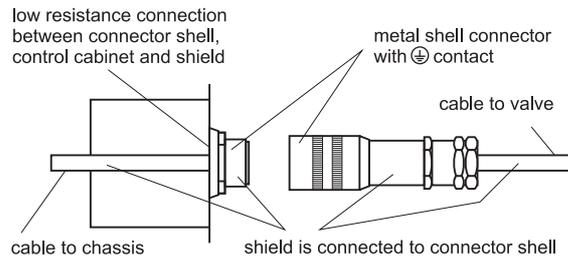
Connecting the cable shield via connector to the control cabinet's wall (detail A from Figure 20)
